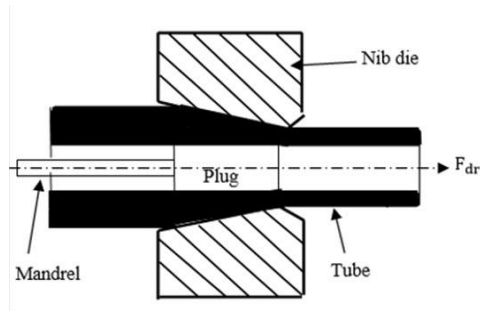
Tube drawing over a stationary mandrel (drawing with a fixed plug)
